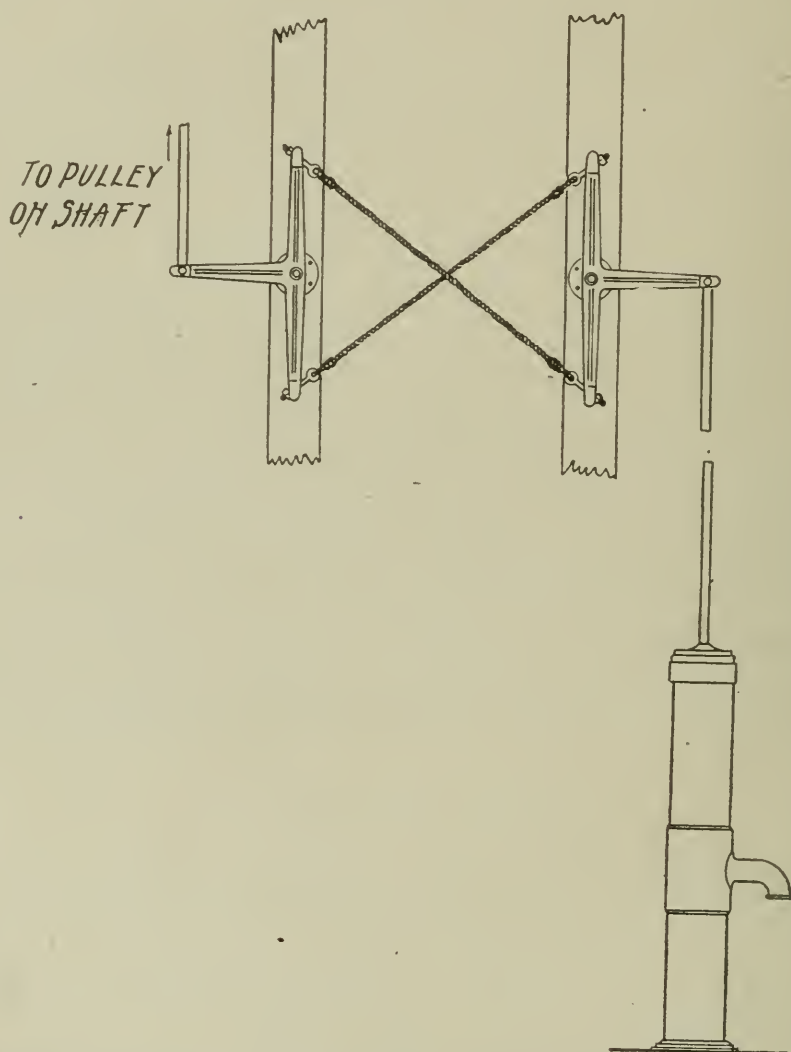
Windmill quadrants for operating a pump at a distance from the mill.
